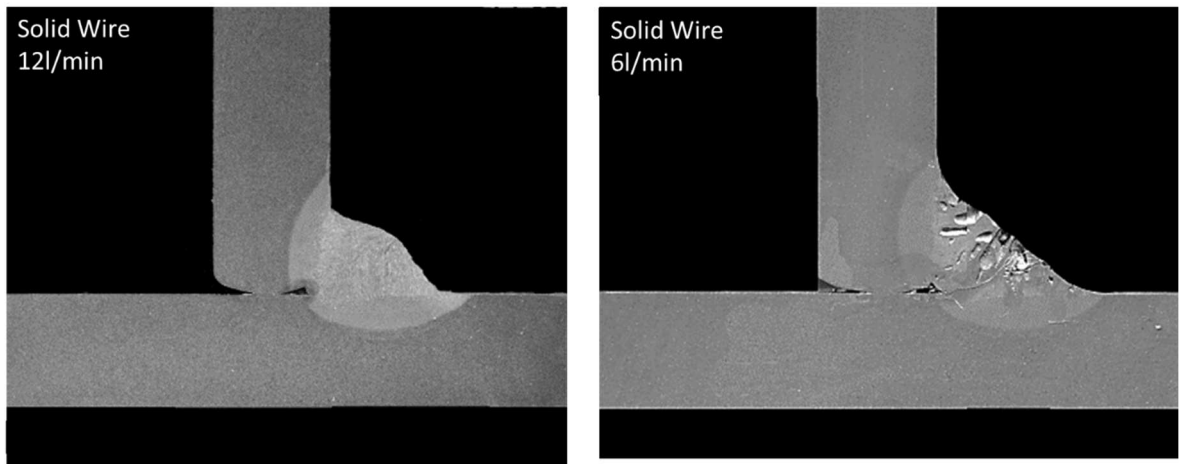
Macro of acceptable solid wire fillet weld at 12l/min and unacceptable fillet weld at 6l/min gas flow rate.
